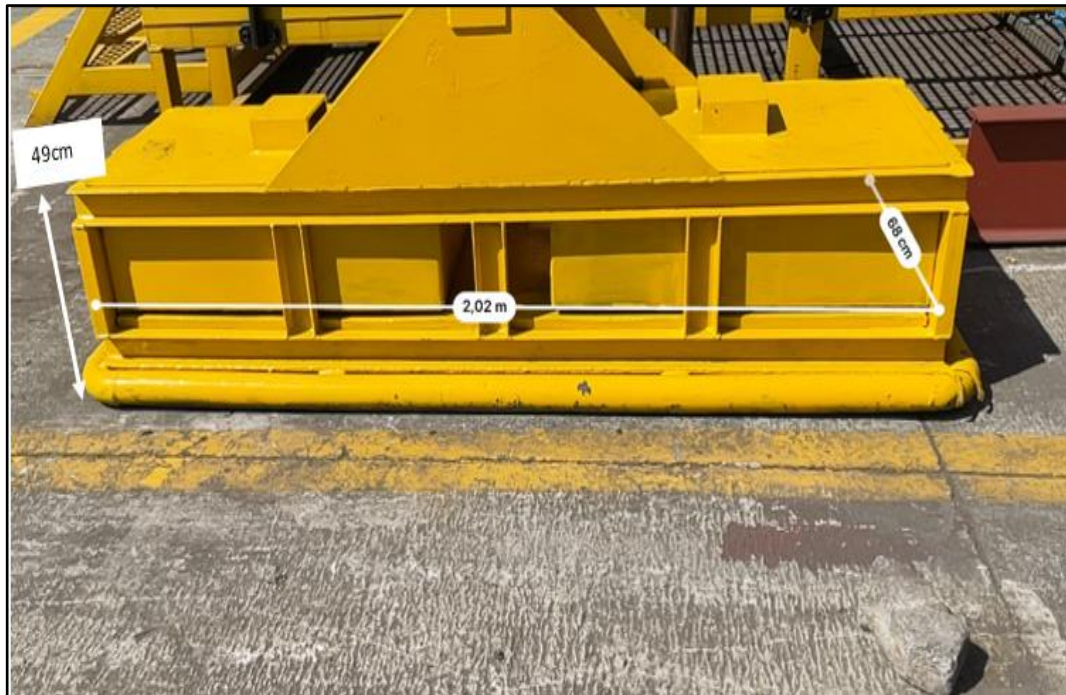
Two tonnes steel slab used at Videx drop test facility
